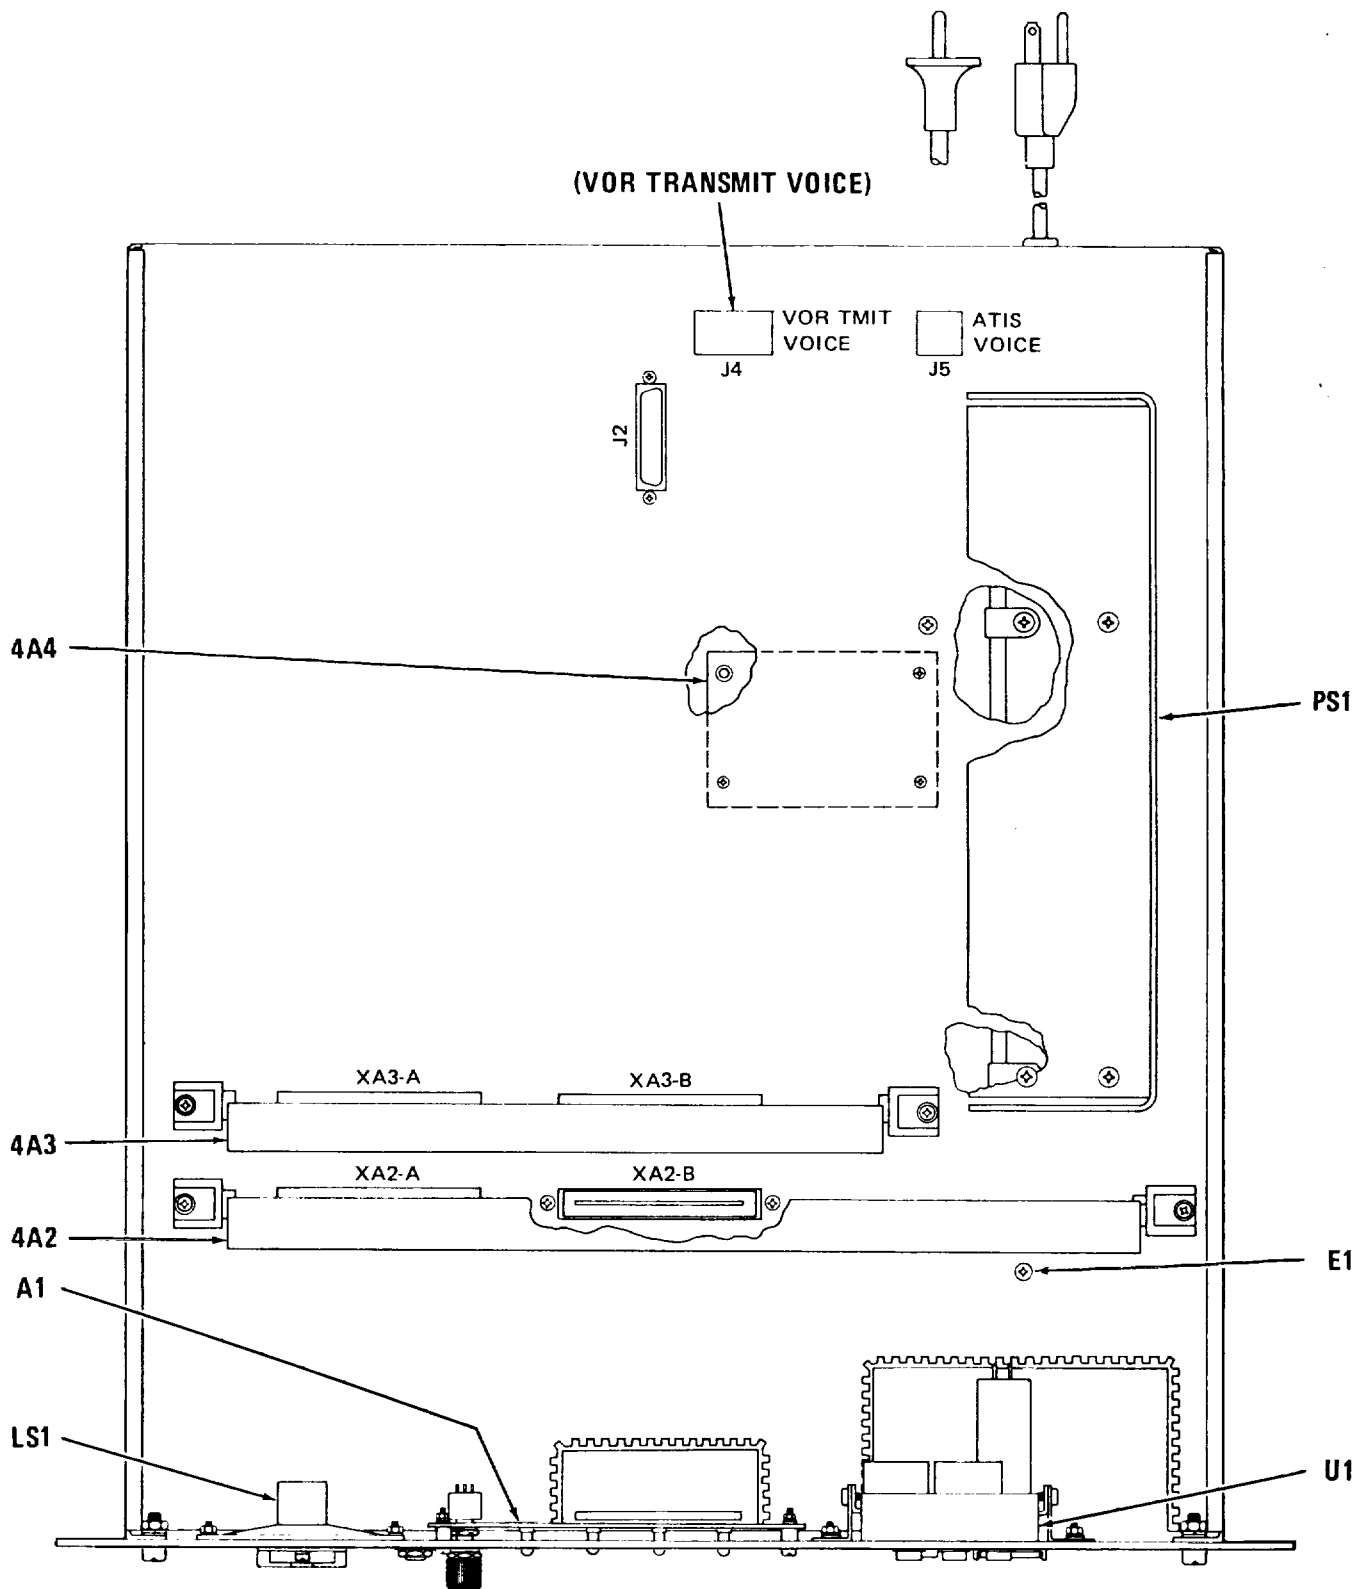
Control-Indicator Front Panel and Chassis-Mounted Parts Location Diagram (Sheet 1 of 3)
